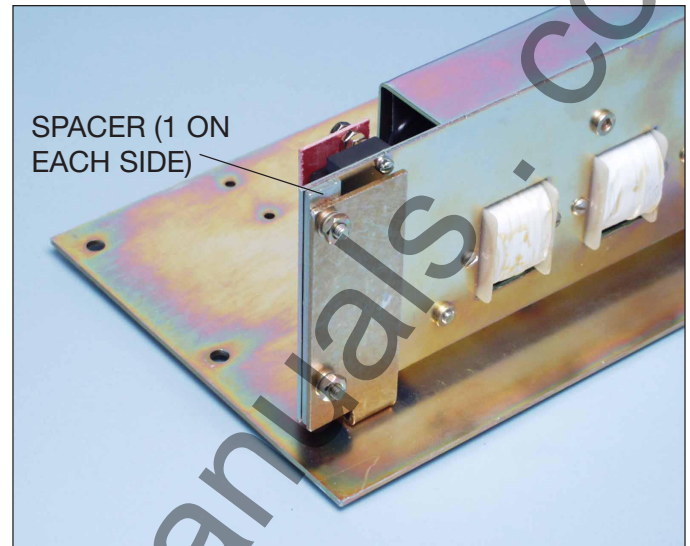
Spacer Placement and Mounting of the Aux. CT Module
